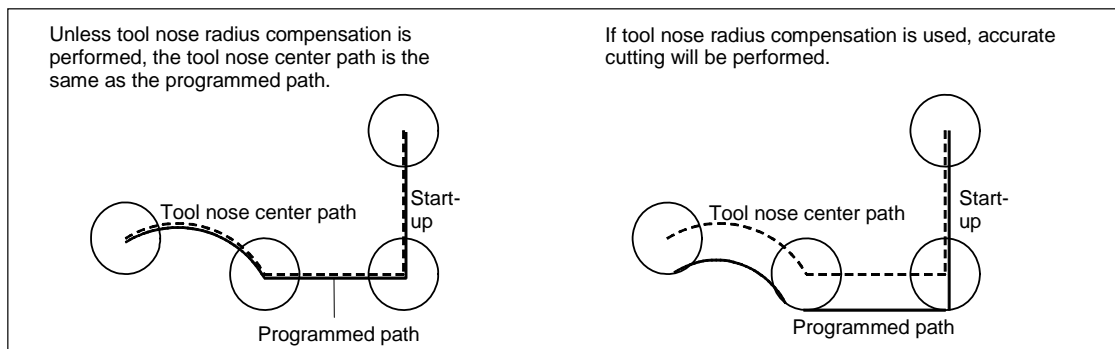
(c) Tool path when programming using the tool nose center
